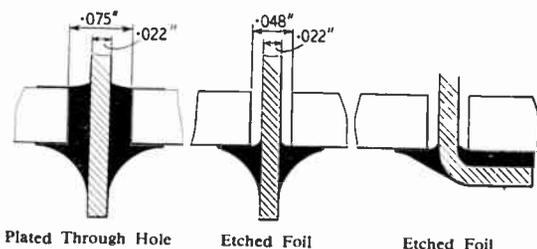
Cross-sectional diagram showing 22 S.W.G. wire in etched foil and plated-through holes. All dimensions are in proportion and indicate the longer soldered joints obtained with plated-through holes.
